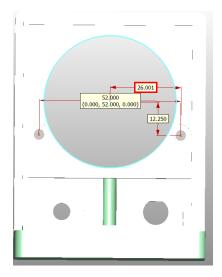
MEASUREMENTS FROM 3D-TOOL
